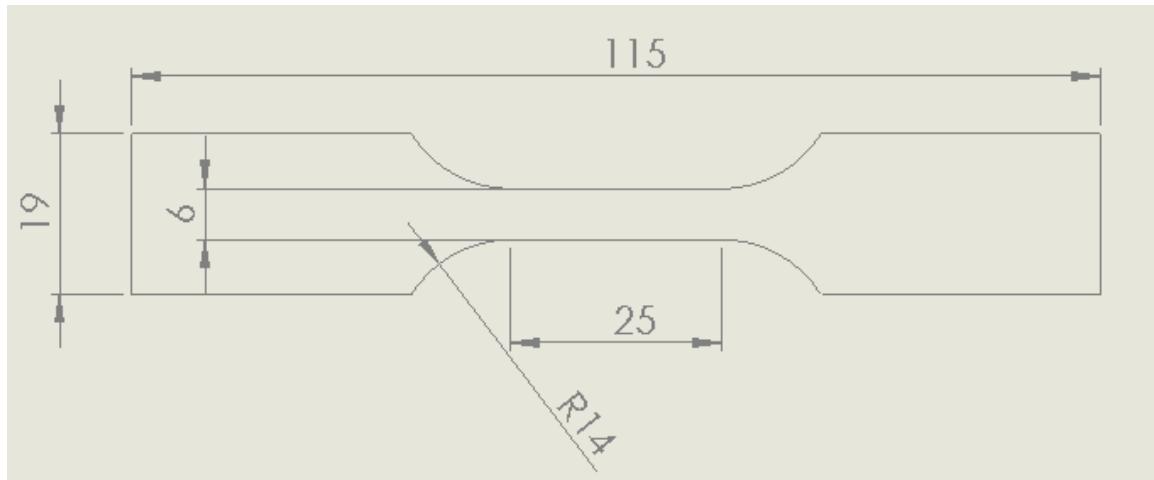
Drawing of the IV specimen (All dimensions in mm).
